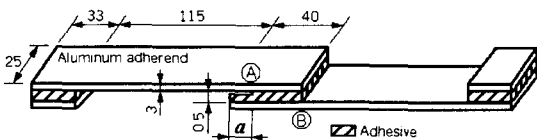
Bonded single lap-joint specimen containing the interface edge crack.
